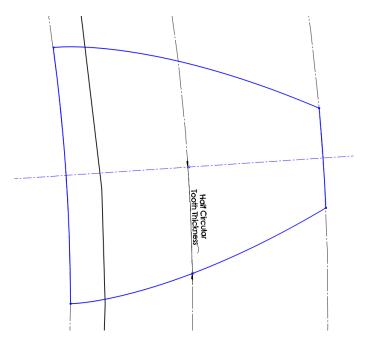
Finished Involute Tooth Profile for the Spur Gear
